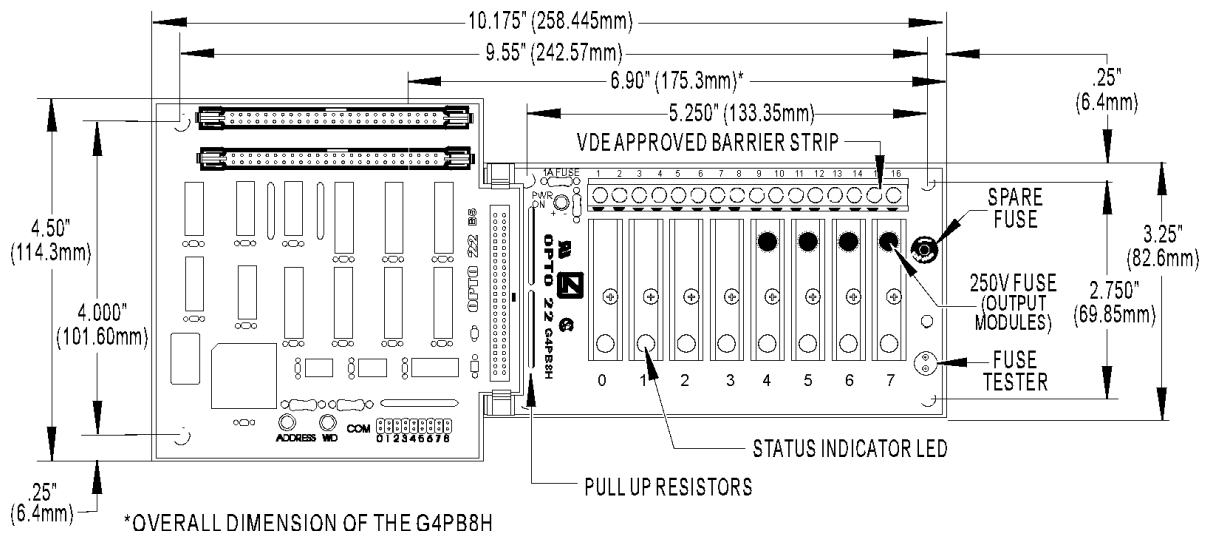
Mounting Dimensions of the G4PB8H with a B5 Installed
